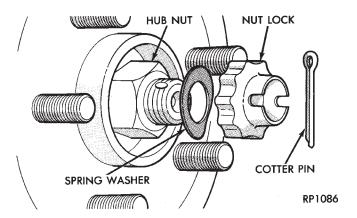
Cotter Pin, Nut Lock and Spring Washer
